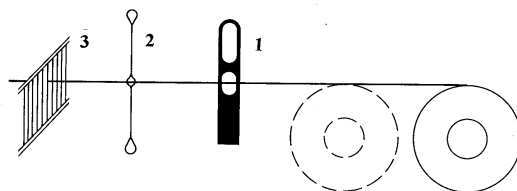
Process of drawing-in threads through the elements of the weaving machine
